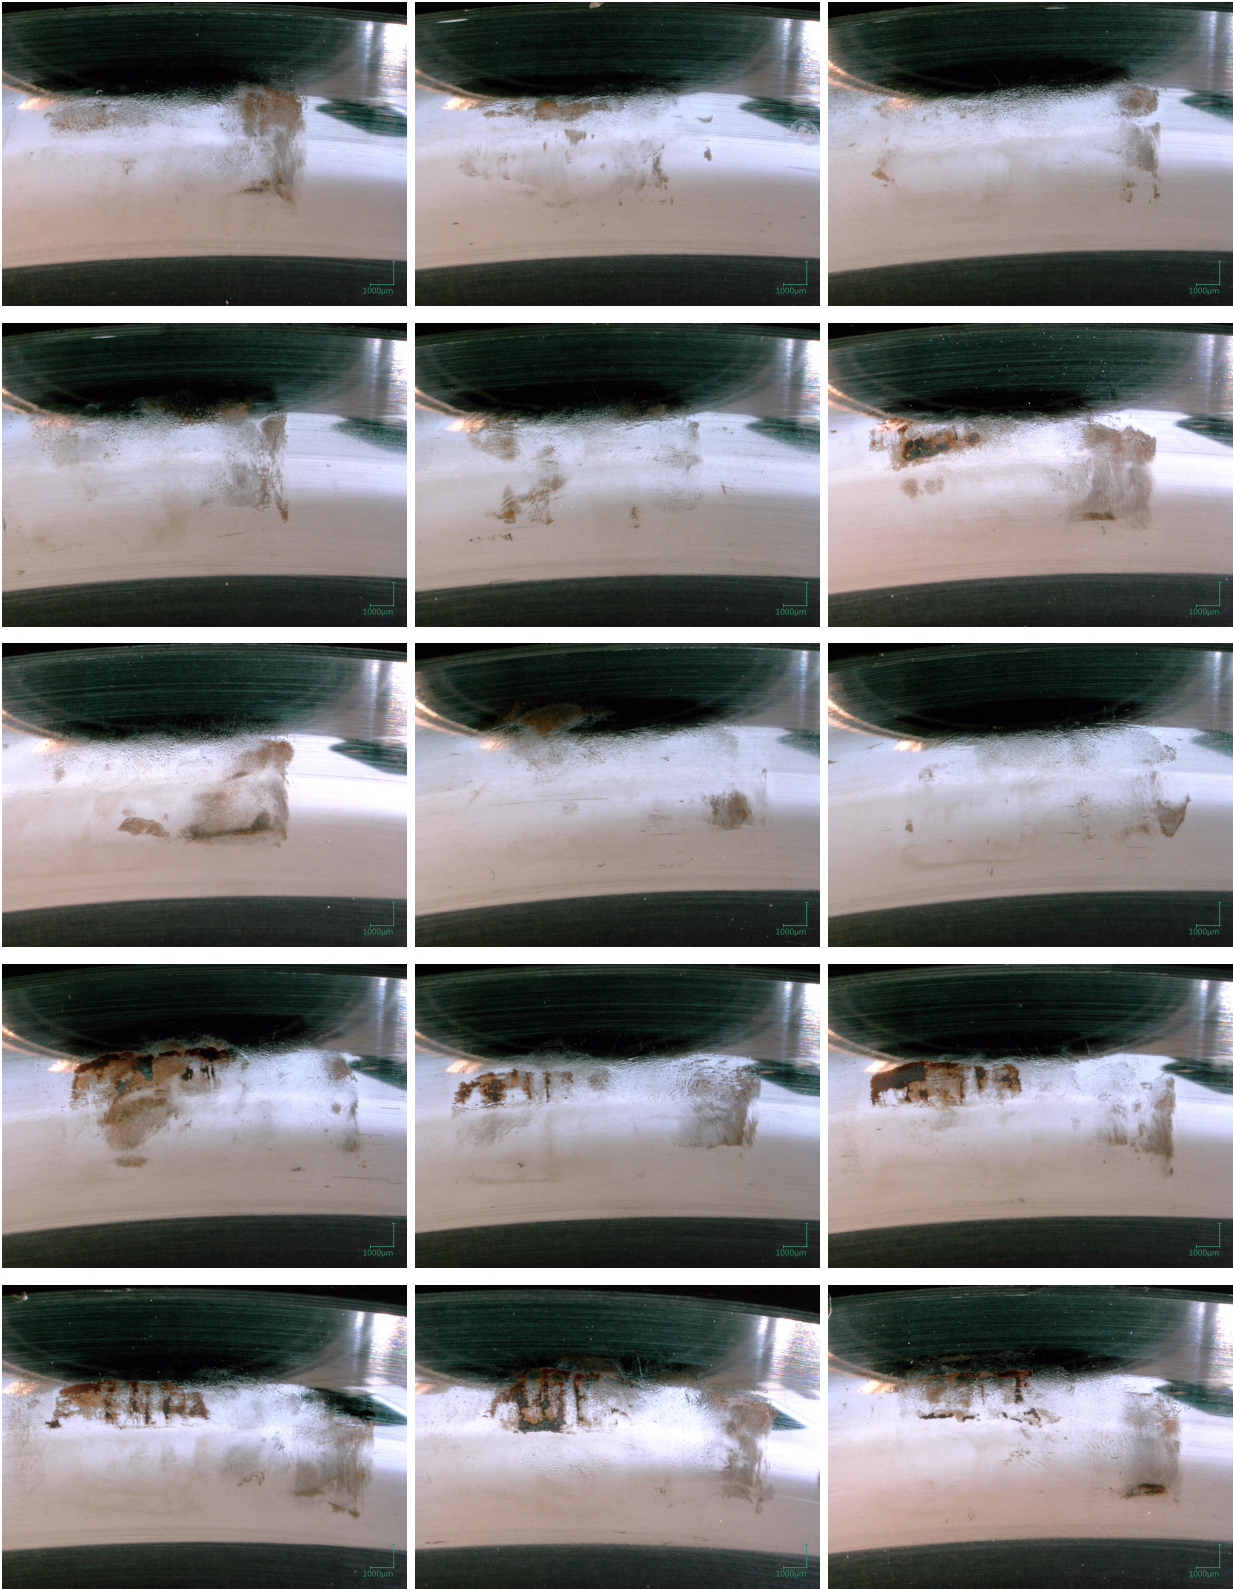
Raceway condition inner ring, Test ID 3, Bearing ID 0026
